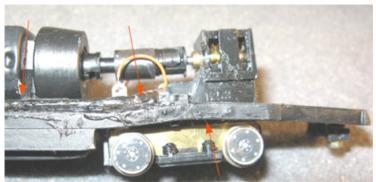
Warped floor with the first attempt to stiffen with tubing.
